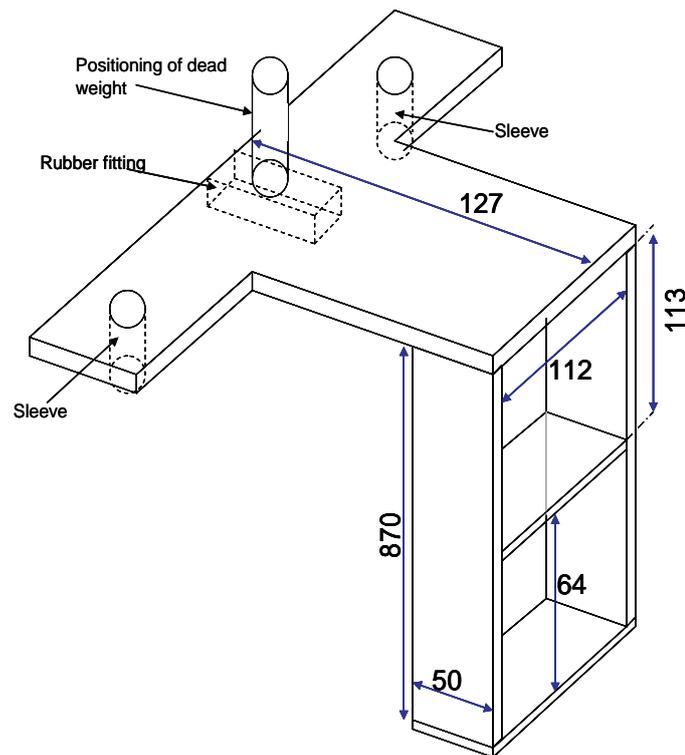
SCHEMATIC OF THE MOUNTING HEAD FOR THE BOSCH®
